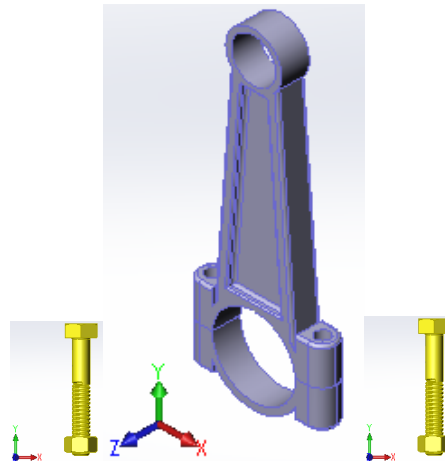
33 Three Dimensional Sketch of Connecting rod
